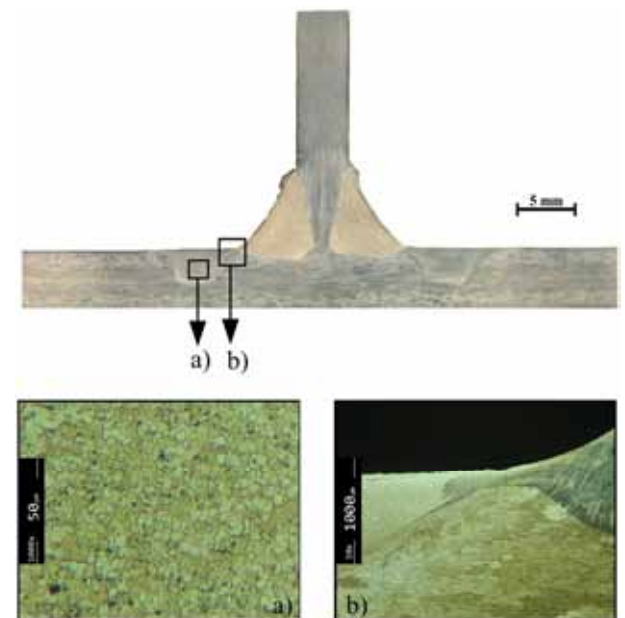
Metallographic analysis of the cross section of a post processed MIG weld: a) nugget zone ; b) toe of a post-processed weld.
